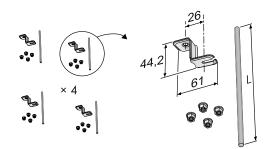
Assembly piece SYST MS M8-1, ceiling mount and threaded rod
